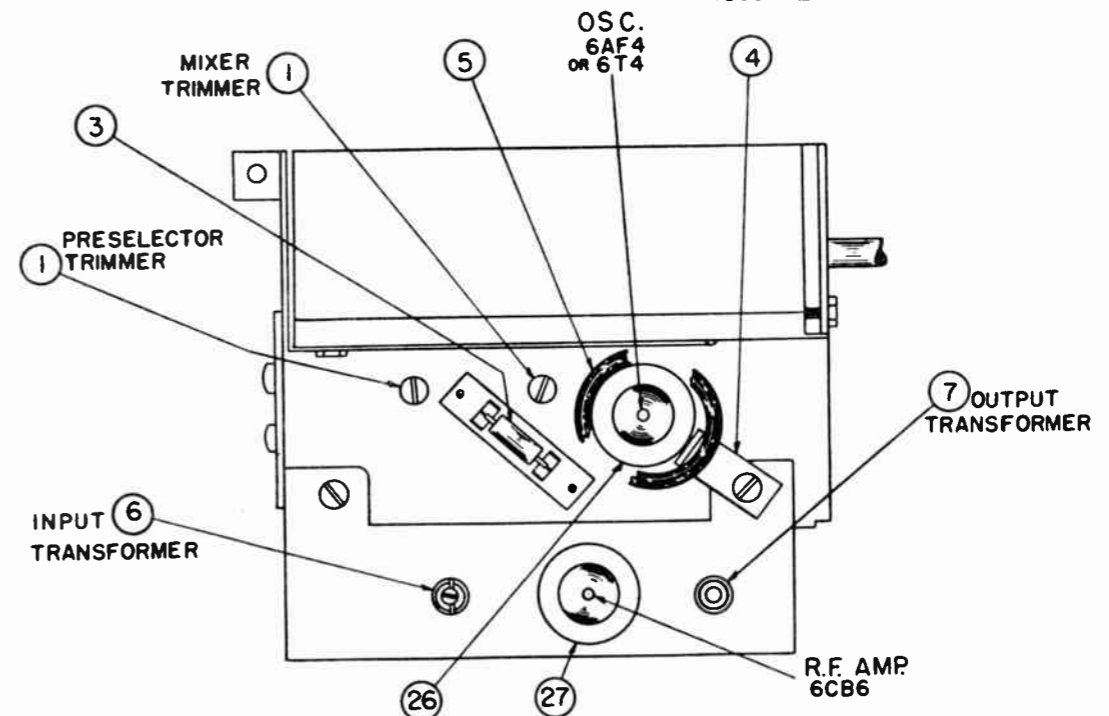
Top View of VHF Cascade Tuner T95-31, Fig. 11. Top and Bottom Views Showing Location of Parts on T-95-32 UHF Converter Showing Adjustments
